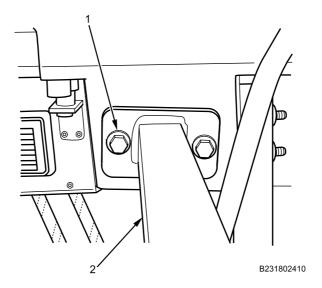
Left Side Gunner Platform Stand Mounting Bolts.
